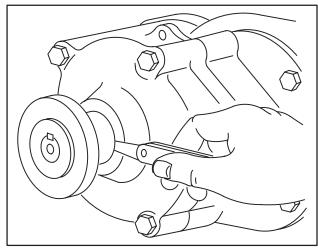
CHECKING END PLAY USING PULLEY POCKET
